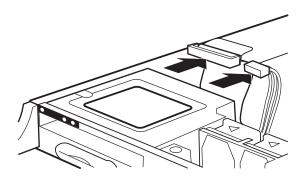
Disconnecting the Cables From the DVD Assembly
